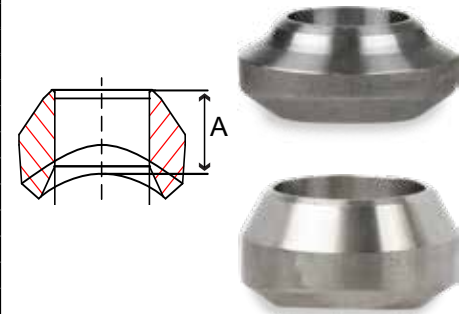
WO3, S4534WO8 & S4636WO8 3000# Butt Weld Outlet Sch 80 Bore
